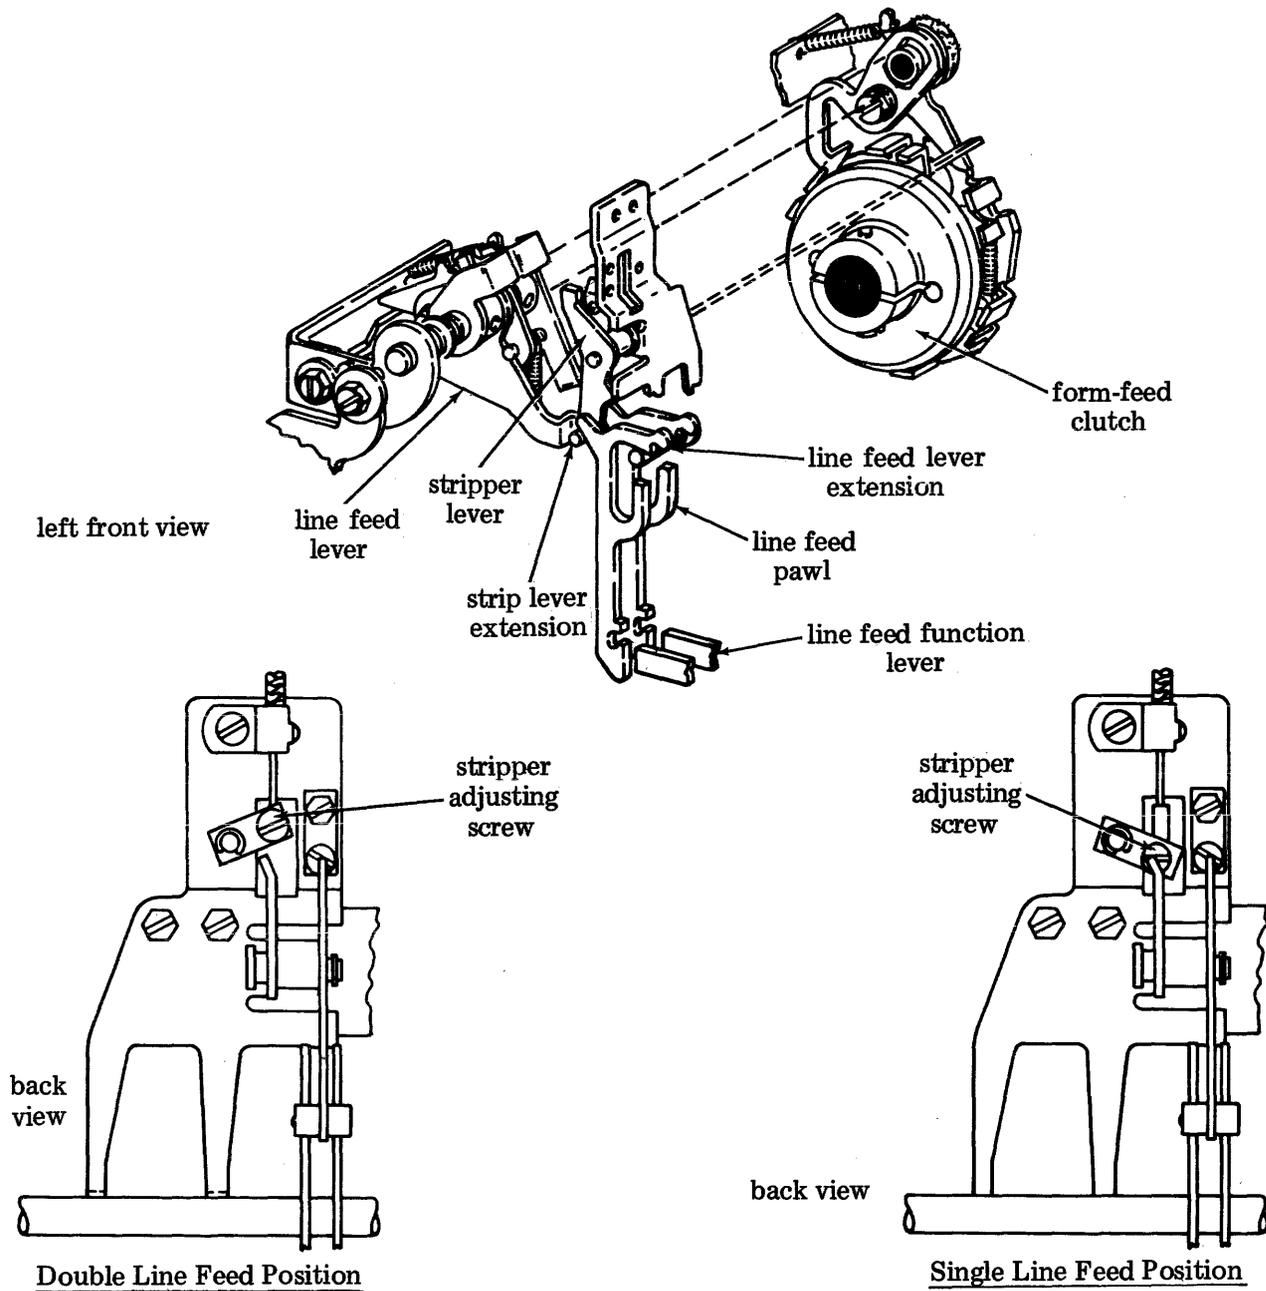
Form-Feed Mechanism (Sprocket Feed)
